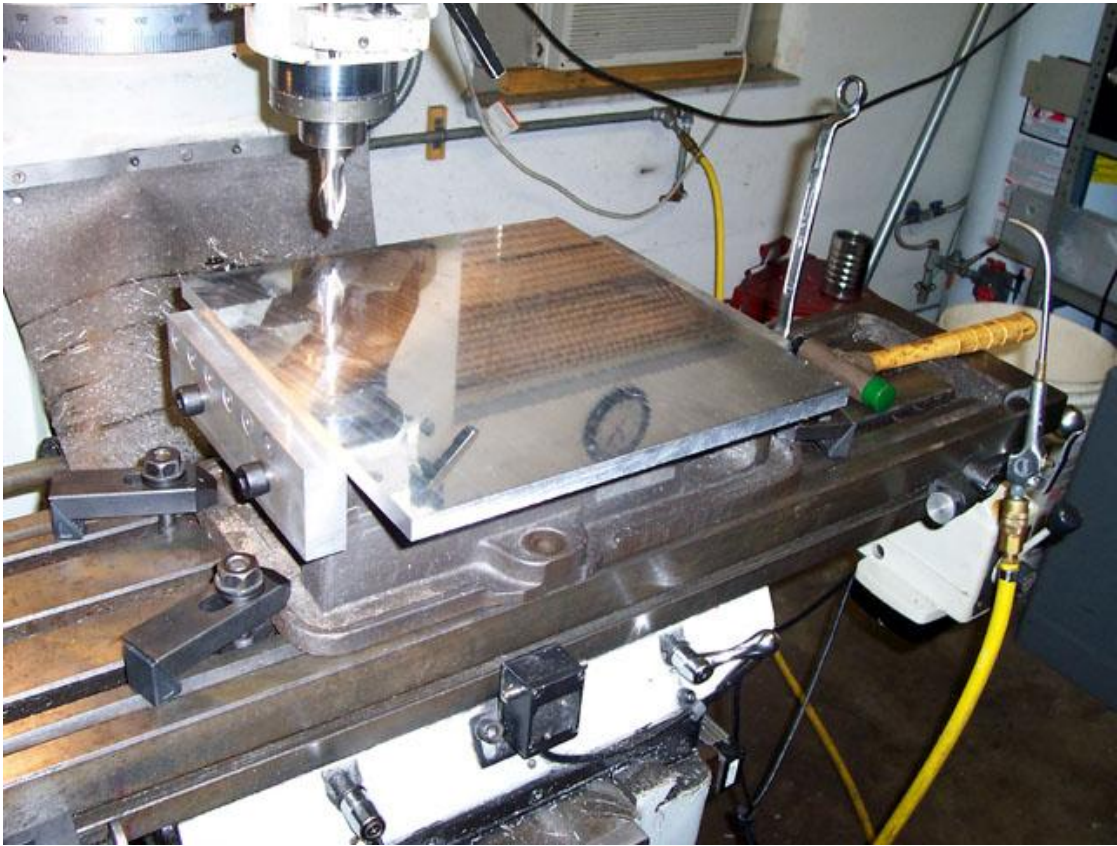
A Kurt Vise is used as an adjustment tool in Milling Techniques
